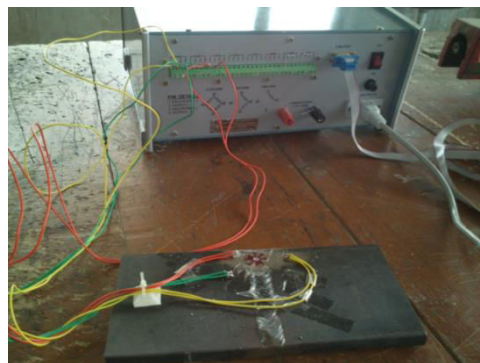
Attachment of strain gauges to welded work piece
